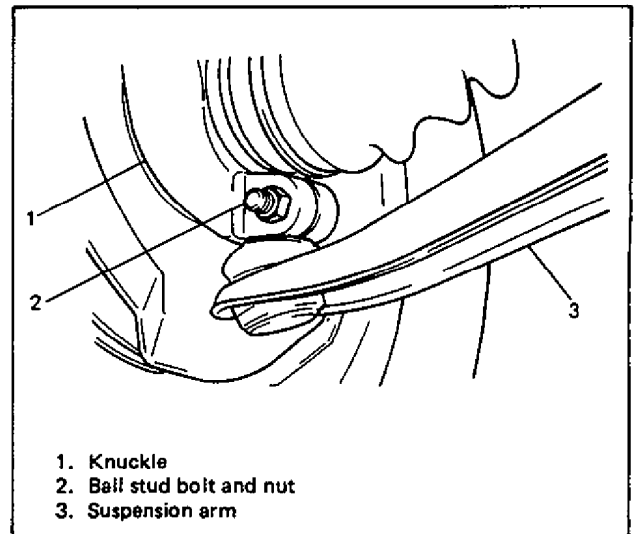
A-10 Detaching Suspension Arm from Knuckle
